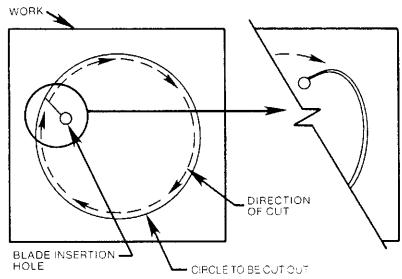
One continuous pass will cut out a circle. Drill the blade insertion hole close to the outline.
